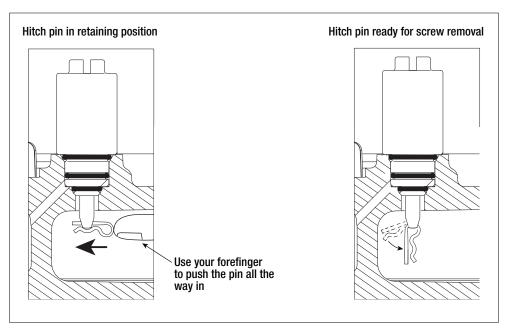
Positioning the Hitch Pin to Allow Air Purge Screw Removal
